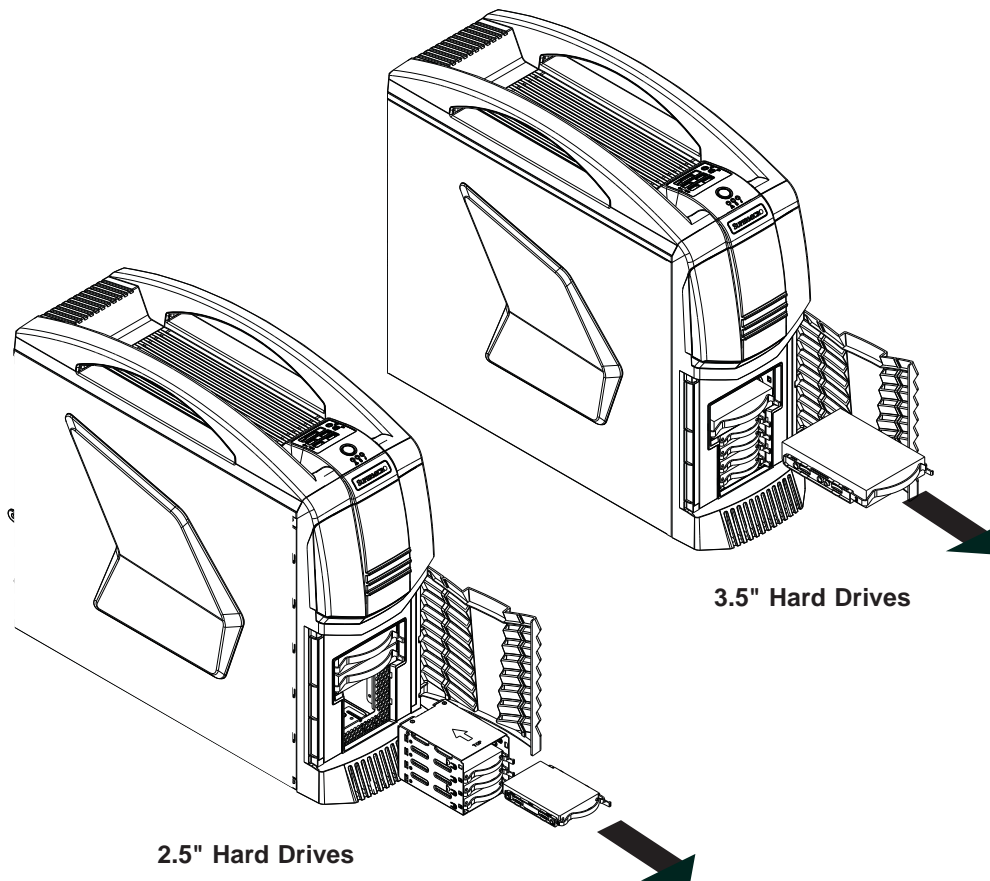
Removing the 3.5" and Optional 2.5" Hard Drives
